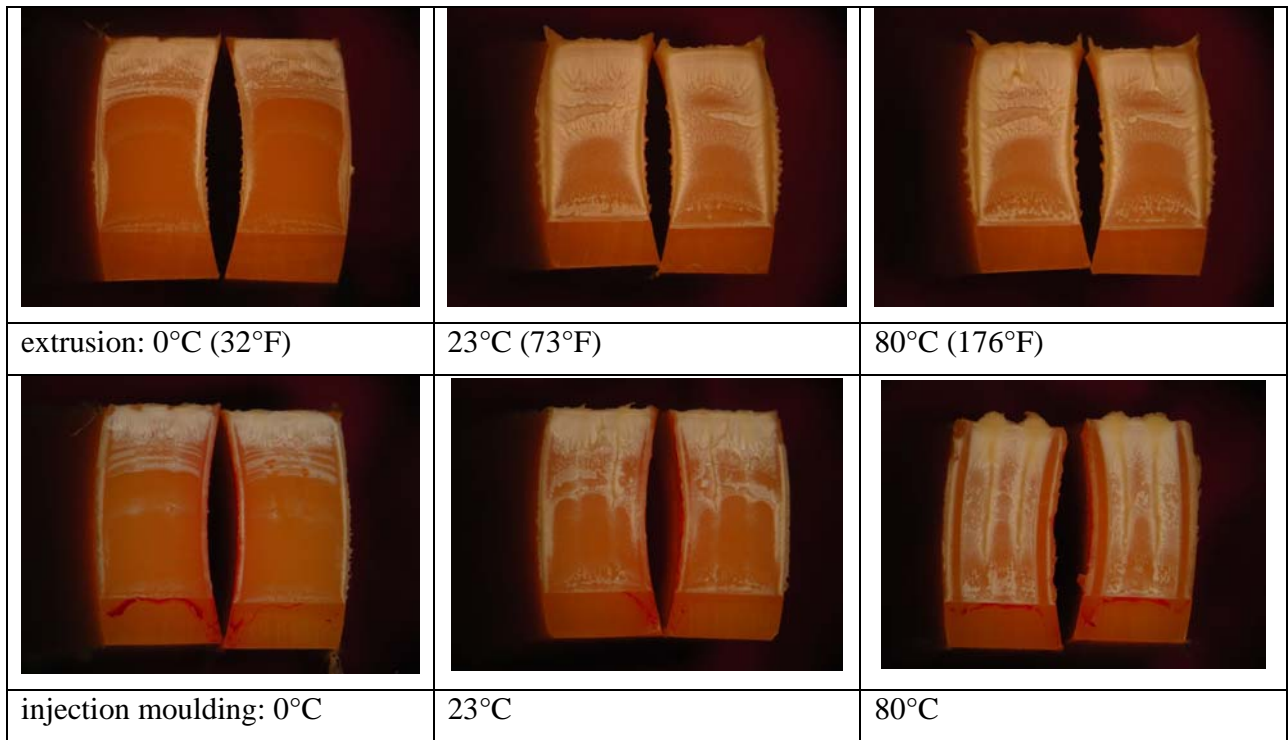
3PB fracture surface of PE1, extruded and injection moulded pipe samples at 0°C, 23°C and 80°C
